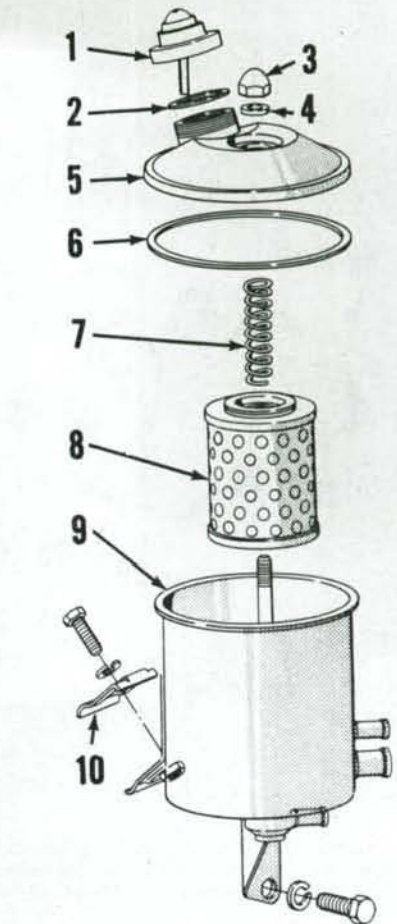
Exploded view of power steering reservoir and filter assembly used on early models.
